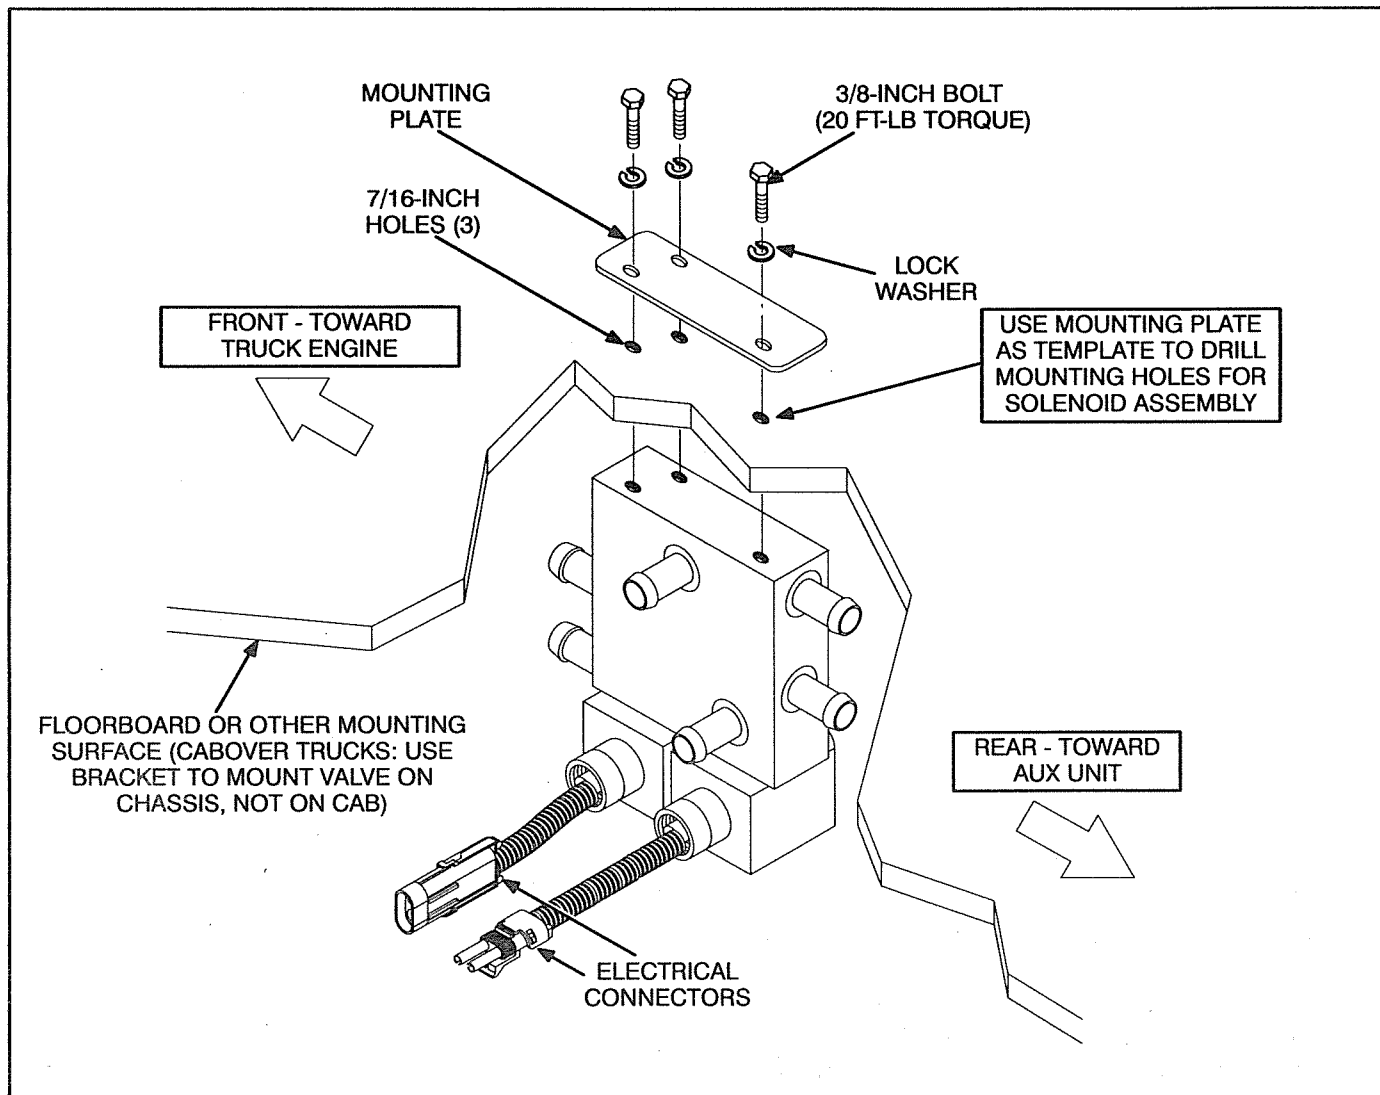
MOUNTING THE SOLENOID VALVE ASSEMBLY
